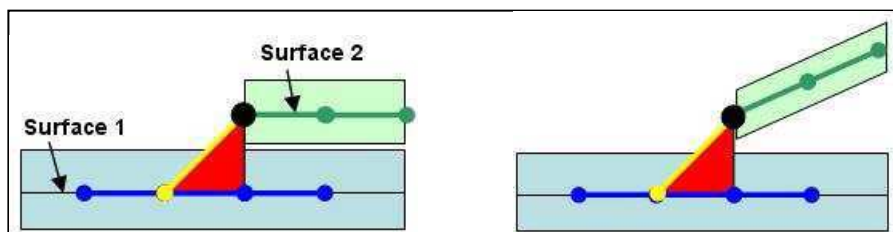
Two types of welding (left: lap type; right: fillet type)
